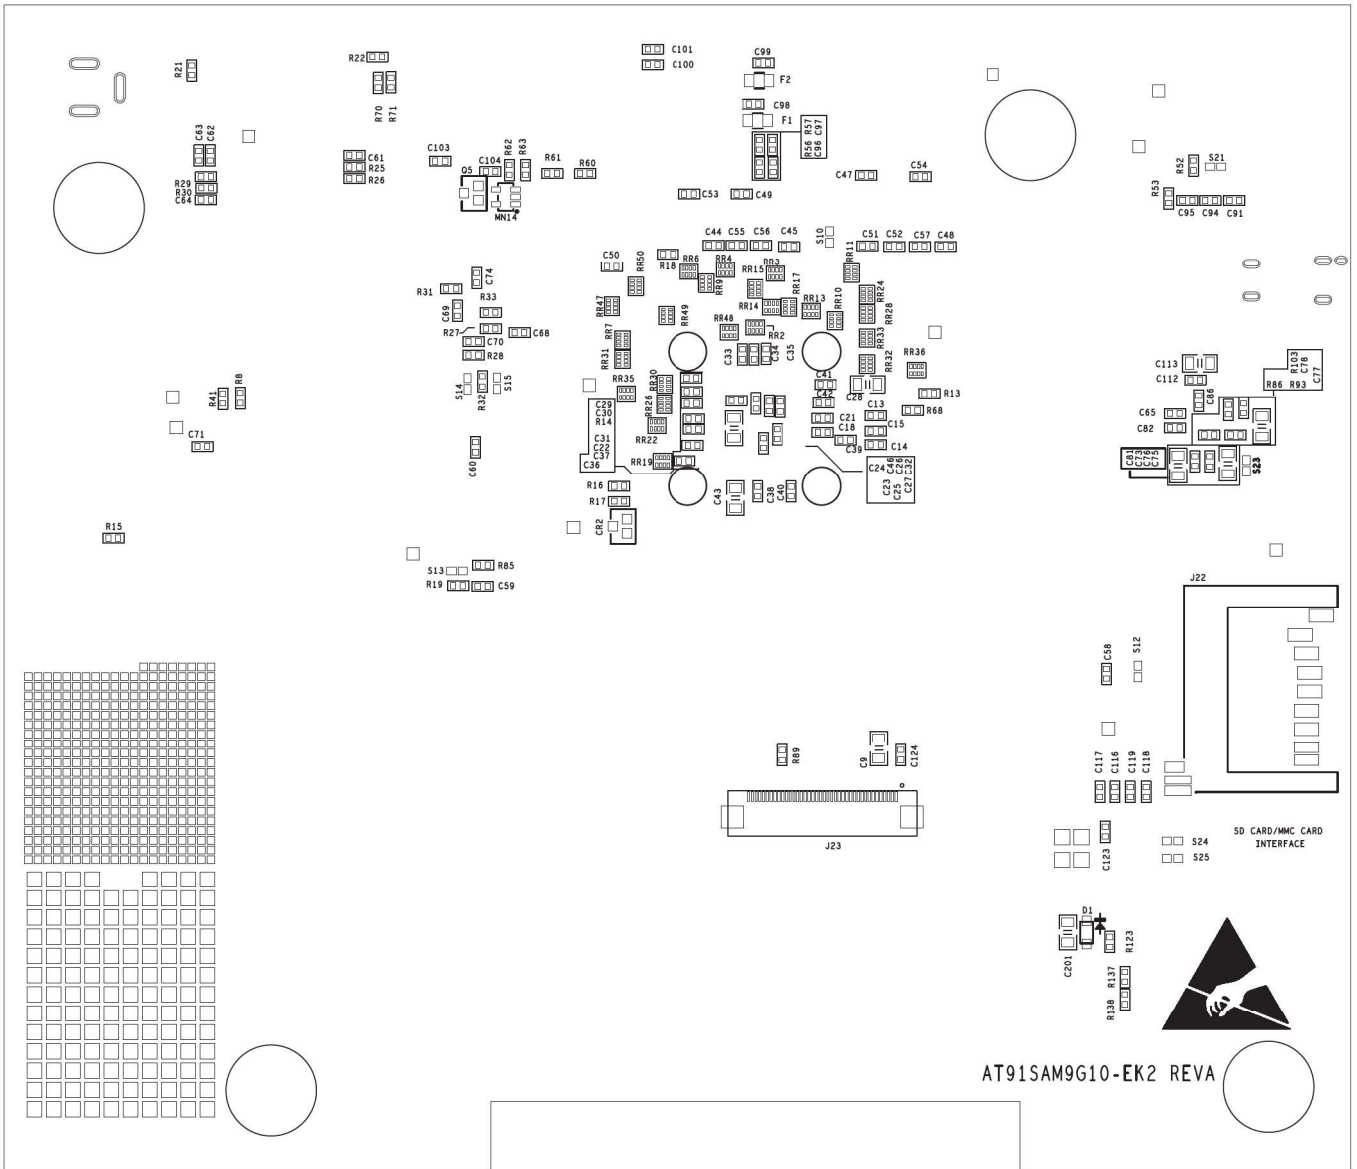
SAM9G10-EK2 Layout - Bottom View
